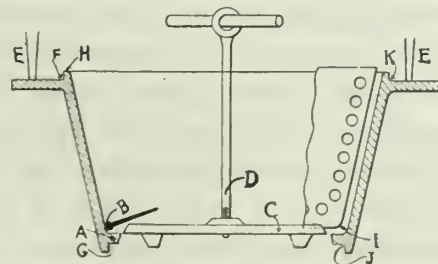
CROSS-SECTION VIEW OF PATTERN MOLDED IN DIFFERENT WAYS.
